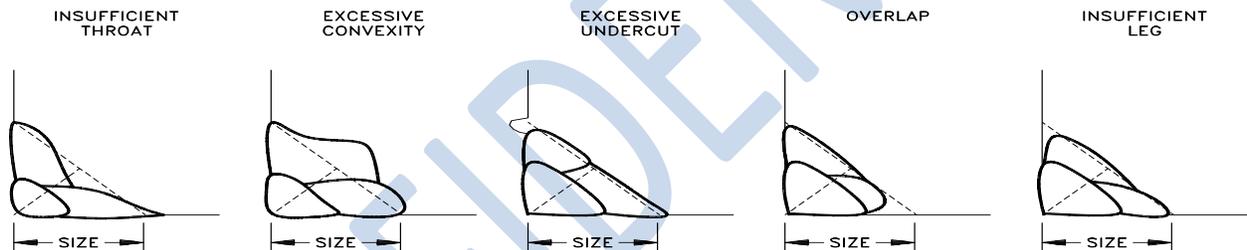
Unacceptable Fillet Weld Profiles
